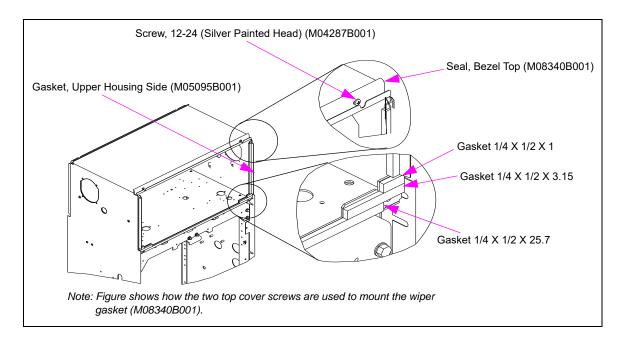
Bezel Sealing Gaskets (for Units Built Before September 2010)
